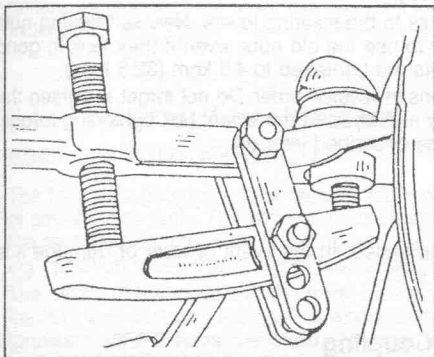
Separating a track rod ball joint from the steering lever with a ball joint puller.
